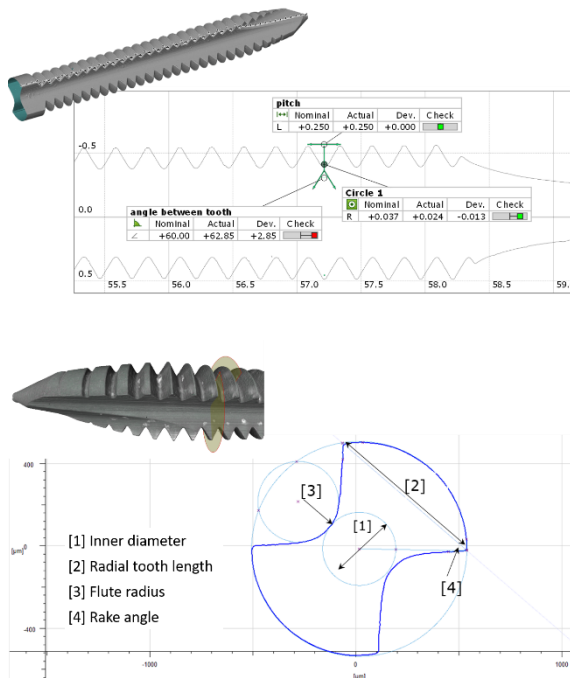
Tool geometry inspection. Top: Evaluation of pitch, thread angle and ground radius by a cutting plane along the tool axis. Bottom: Evaluation of several parameters (inner diameter, radial tooth length, flute radius and rake angle) on the cross section of a helical cutting plane.
